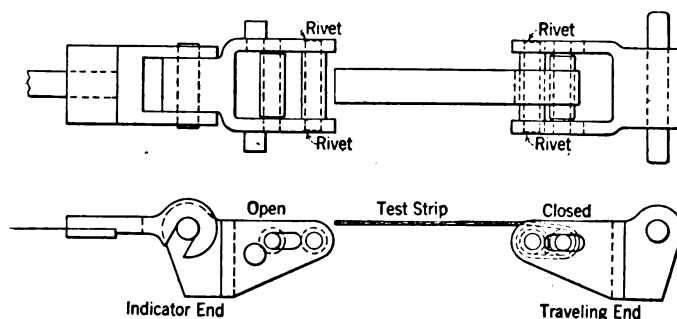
GRIPS FOR MACHINE FOR TESTING TENSILE STRENGTH OF CABLE PAPER
